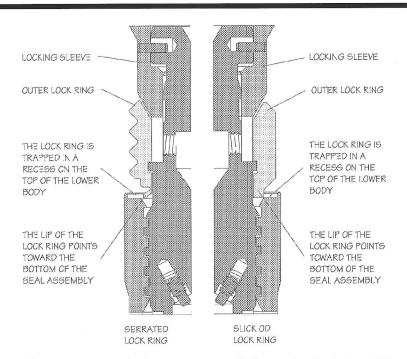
Outer lock rings are installed onto the Seal Assemblies
